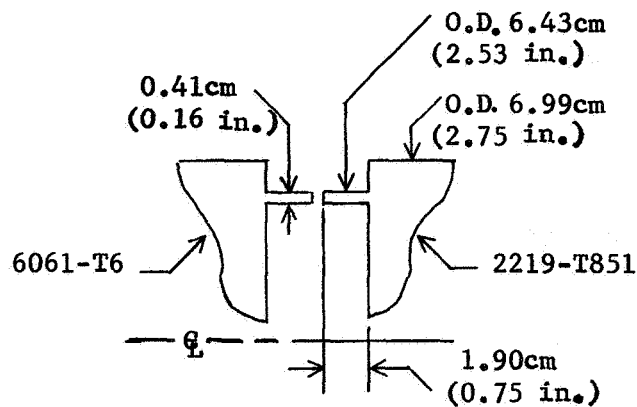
Inertia Welding 2219 to 6061 Aluminum During Development
